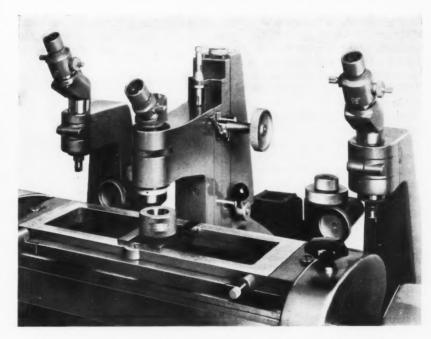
Close-up view of universal measuring microscope equipped with "Perflectometer" set up for measuring diameter of ring gage
